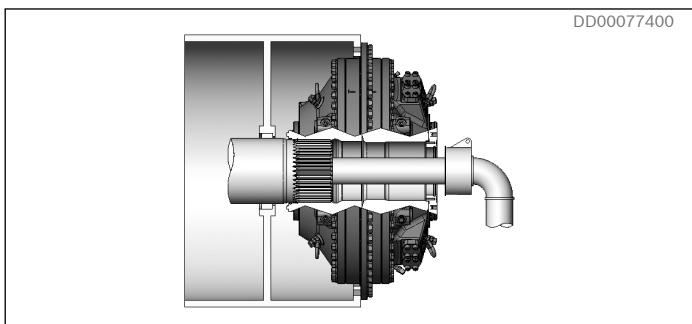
Flange mounted motor with splines and through hole for cooling of the driven machine.
